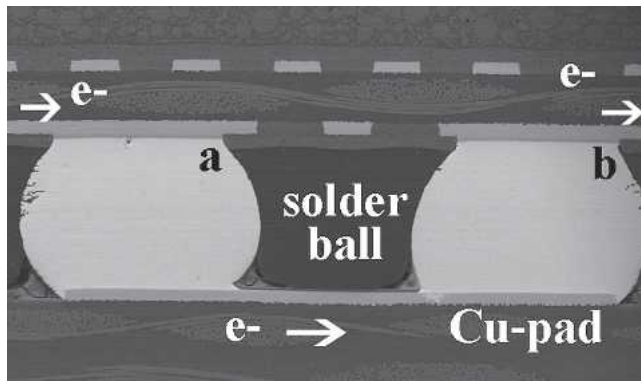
Cross-sectioned FPBGA solder joint, showing the direction of the electron flux through the two daisy chained solder balls with the EM test at 5,000 A/cm²; the directional effect of current at solder ball a and b is inverse.
